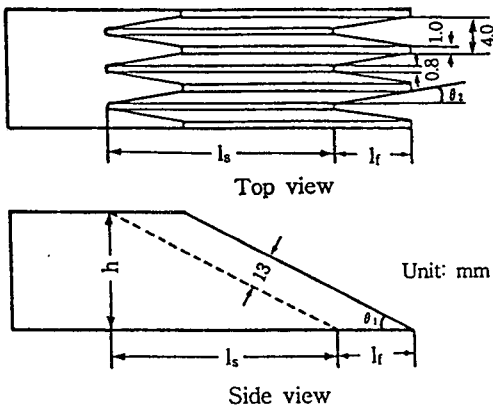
Type of specimen with a sloped finger-joint to be tested.
